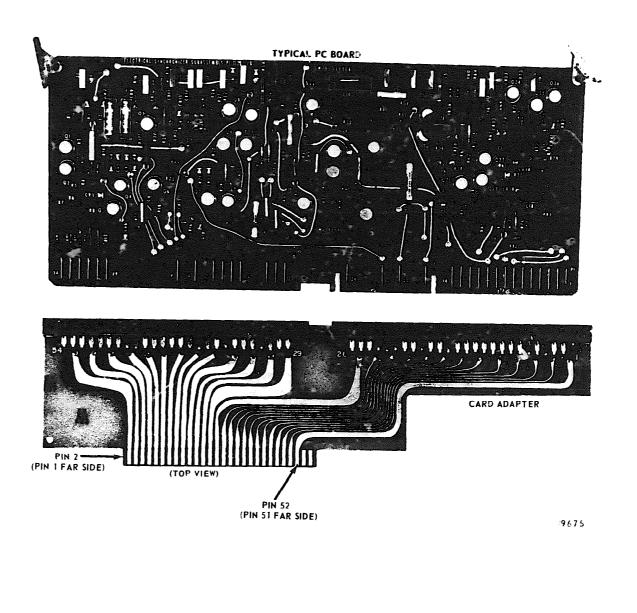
Printed Circuit Card Adapter MX-9092/USM-371
